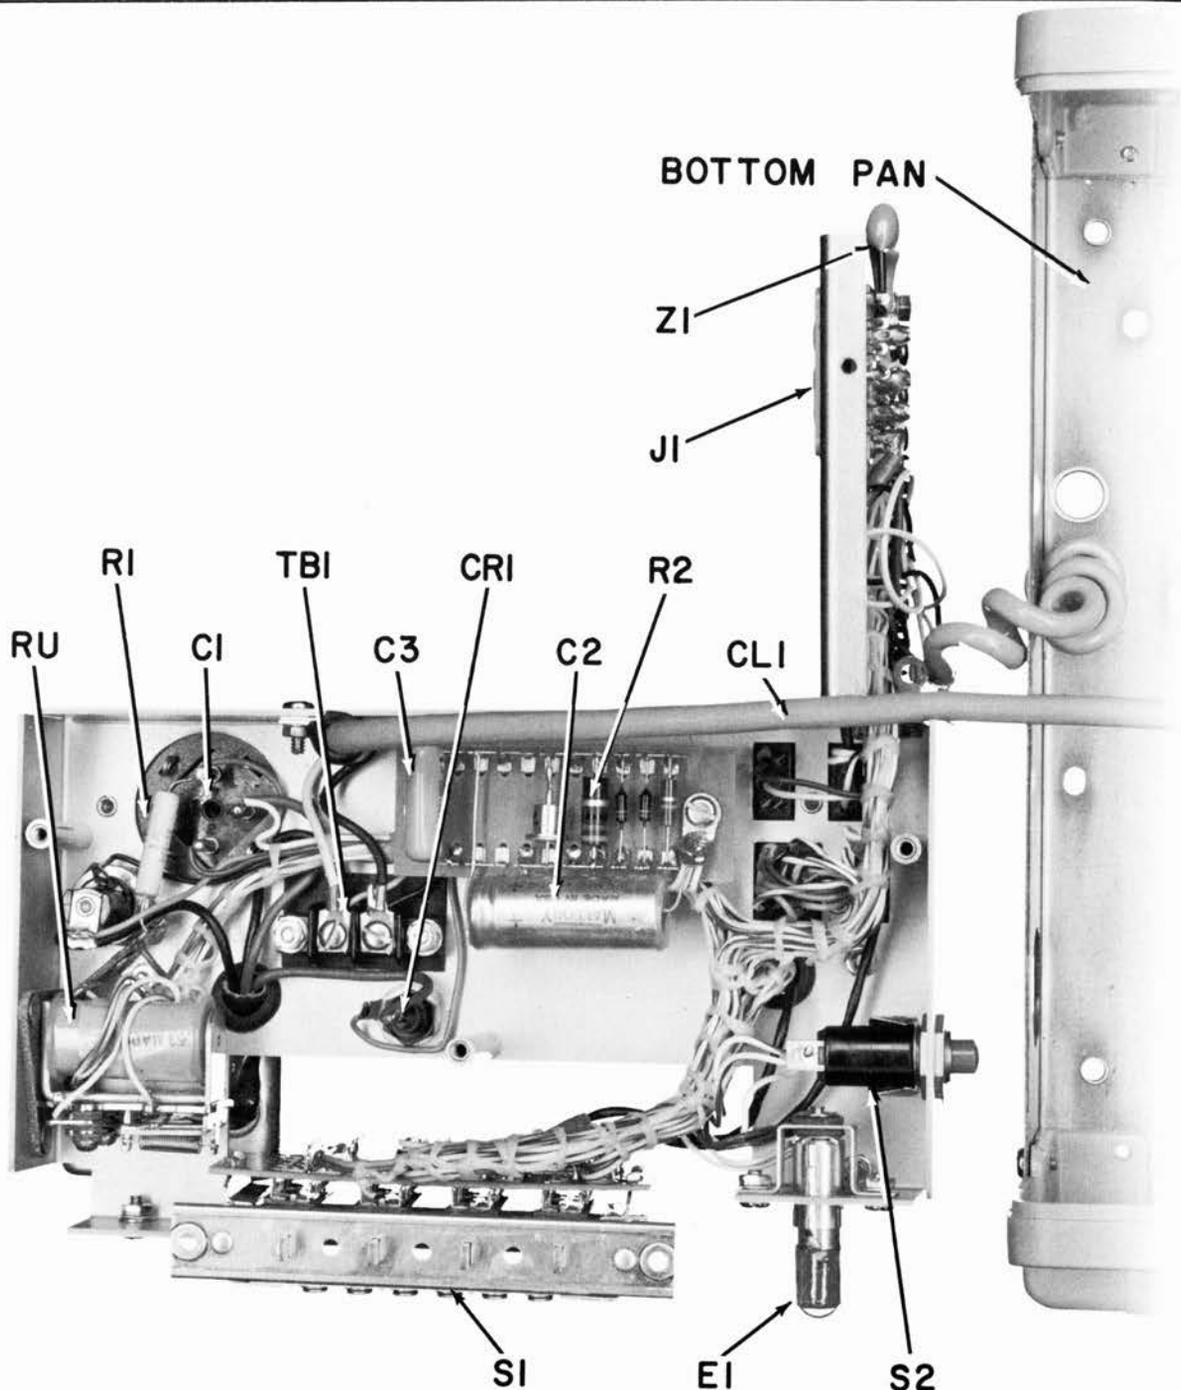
CHASSIS REMOVED FROM BOTTOM PAN
